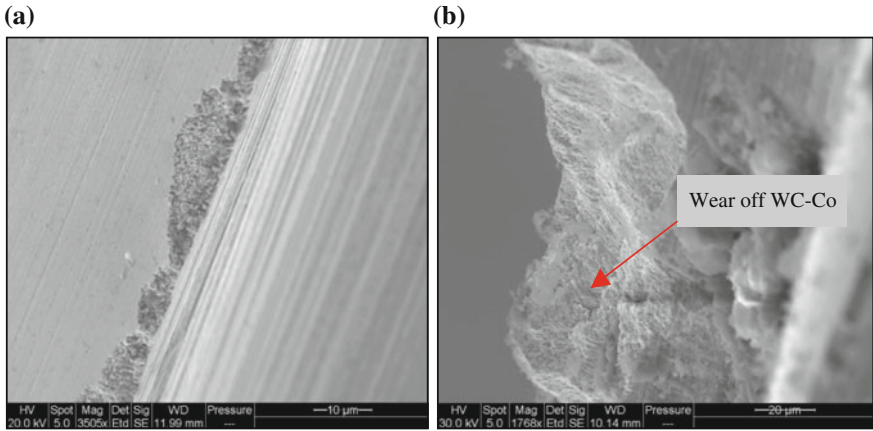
a Cutting edge of WC-Co surgical tool after machining glass; b close-up view of WC-Co surface of the surgical tool
